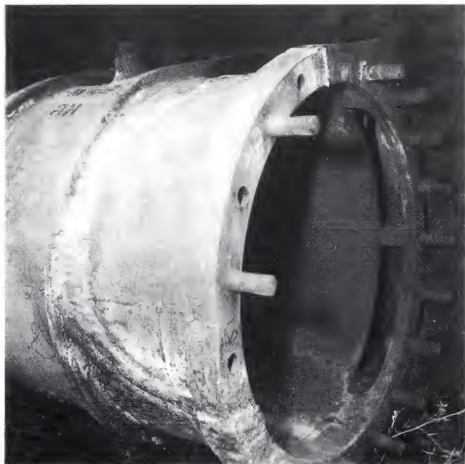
The cylinder block on locomotive 5323. The damage was repaired by bronze welding — on refelction... how did we do such big jobs?
